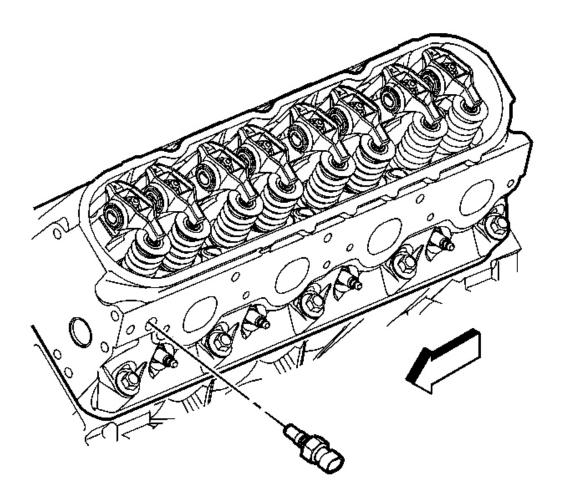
View Of Coolant Temperature Sensor (Left Cylinder Head) Courtesy of GENERAL MOTORS CORP.
